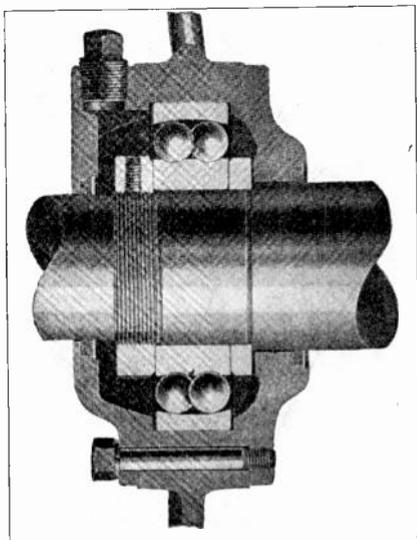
Sectional view of a double-row ball bearing, showing inner and outer bearing races and some of the balls.
